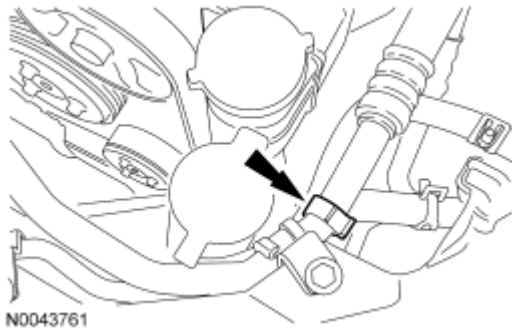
Locating Coolant Vent Hose Retaining Clip
